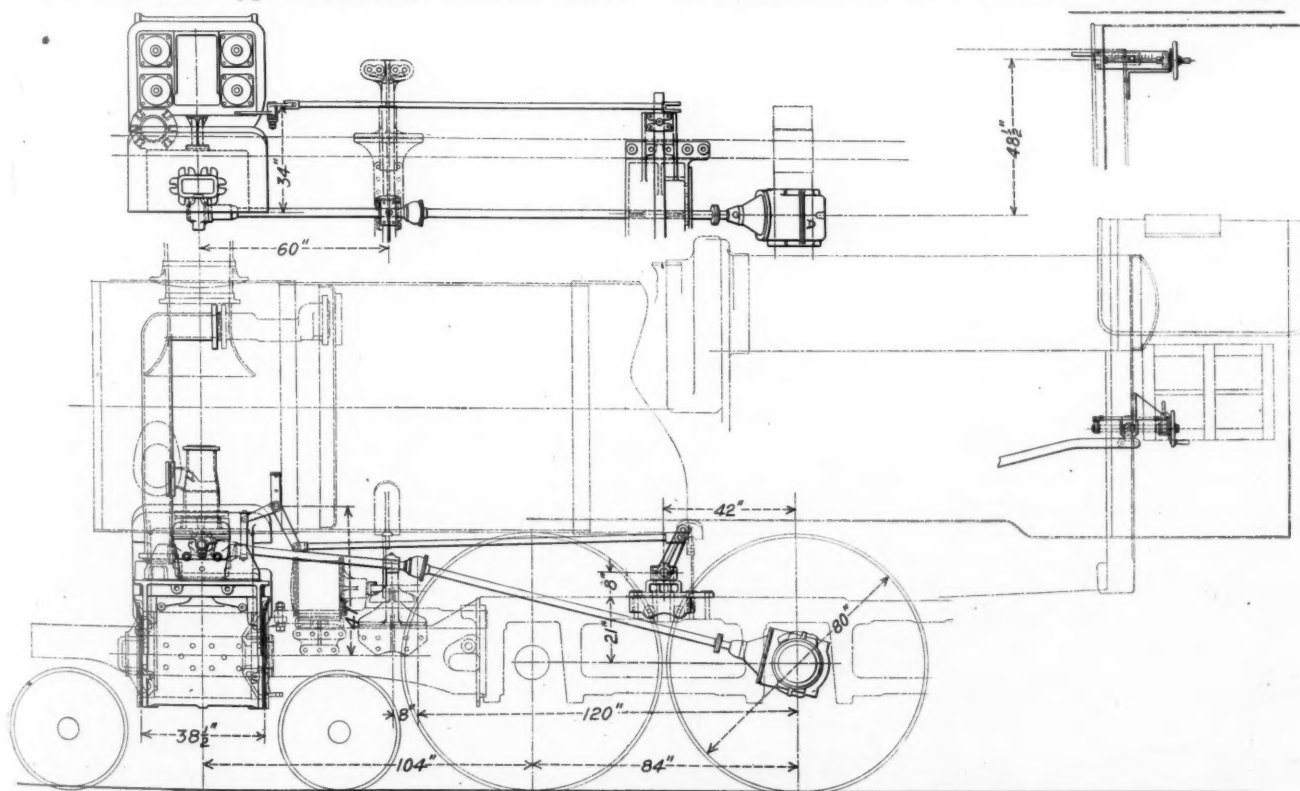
Side elevation showing the arrangement of the Caprotti valve gear
